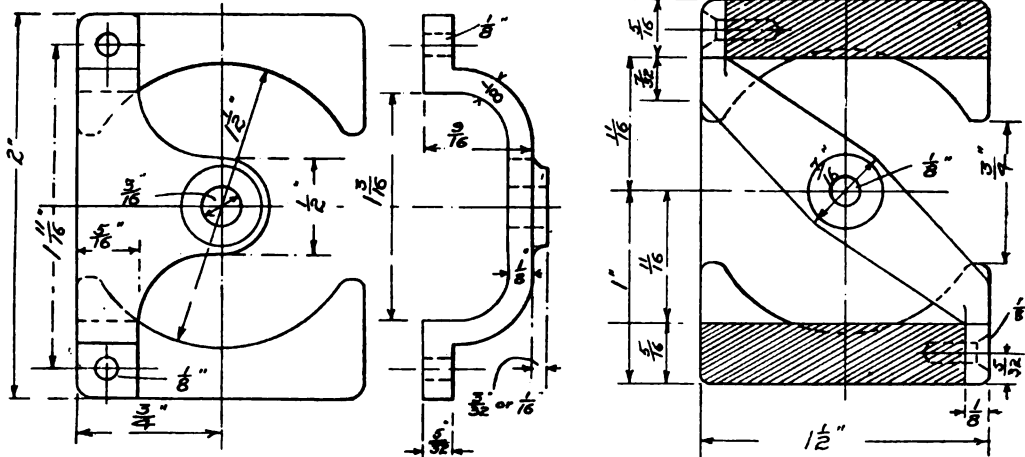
BEARING BRACKETS FOR 2-IN. GAUGE ELECTRO-MOTOR.
